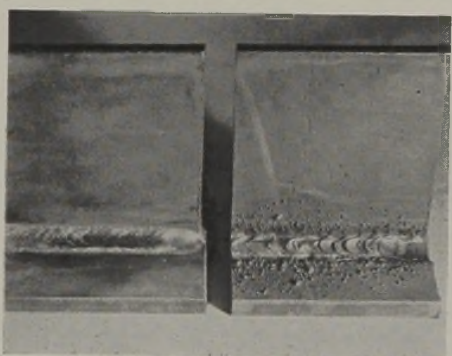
(left) Weld made with proper current and arc length, note absence of adhering splatter. (right) Weld made with excessive current and arc lengths, note excessive splatter and poor appearance.
